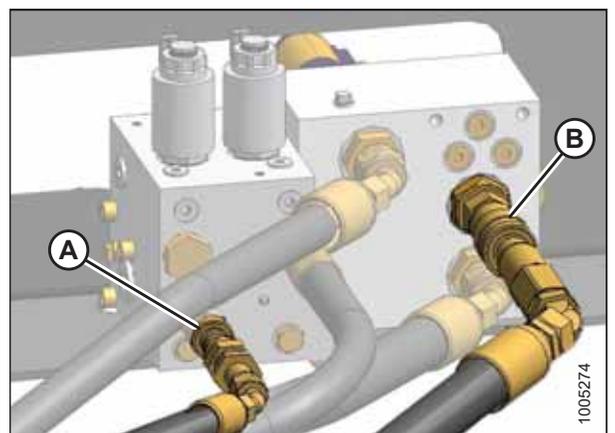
Auger Pressure and Auger/Reel Return Hose Couplers – 4.9 m (16 ft.) Header Shown (5.5 m [18 ft.] Similar)
